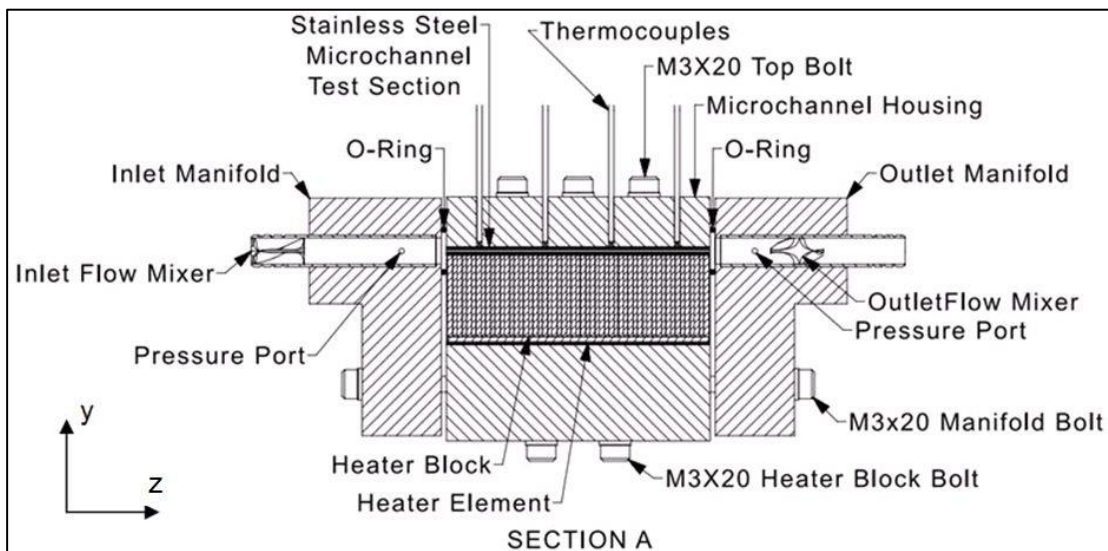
Section view through line A-A showing the components of the microchannel test section assembly
